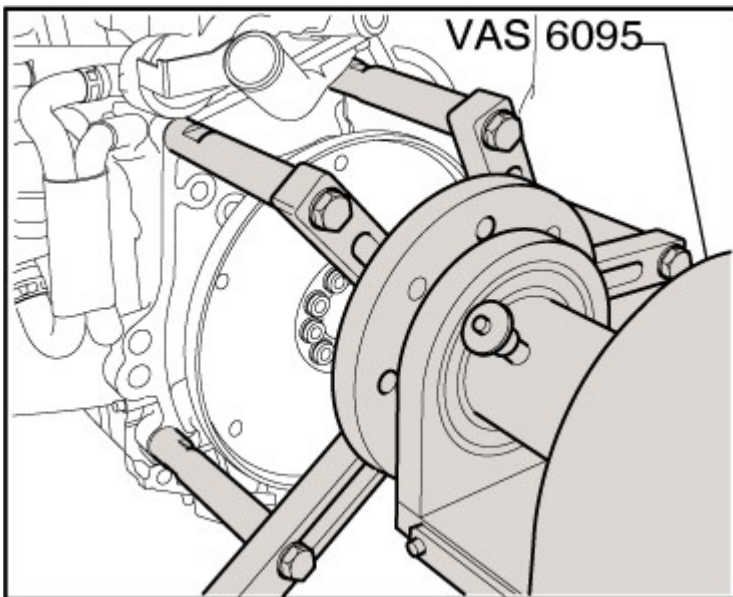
Identifying Engine And Transmission Holder VAS 6095
